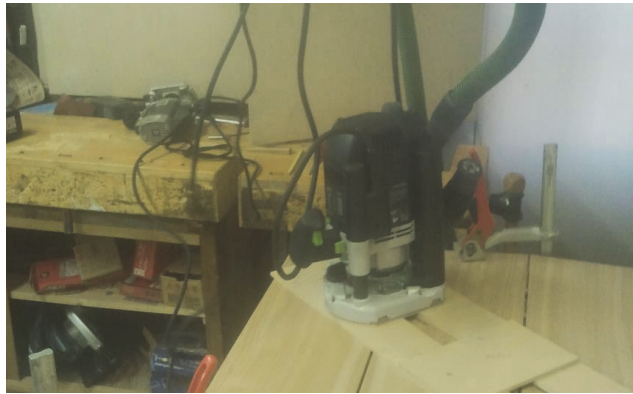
Photo II: a router and jig I to make a 7-degree angle socket for the dovetail joints.
